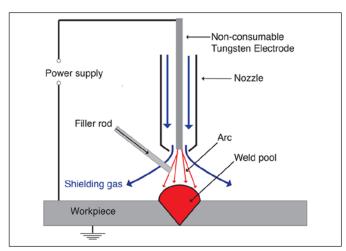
• The principles of gas tungsten arc welding.
